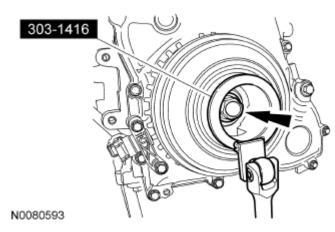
Locating Crankshaft Pulley Bolt Courtesy of FORD MOTOR CO.
